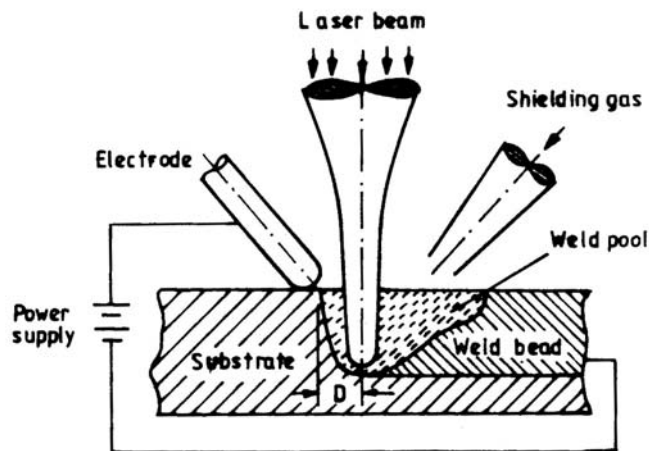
Scheme of experimental set-up for laser welding with an external current.
